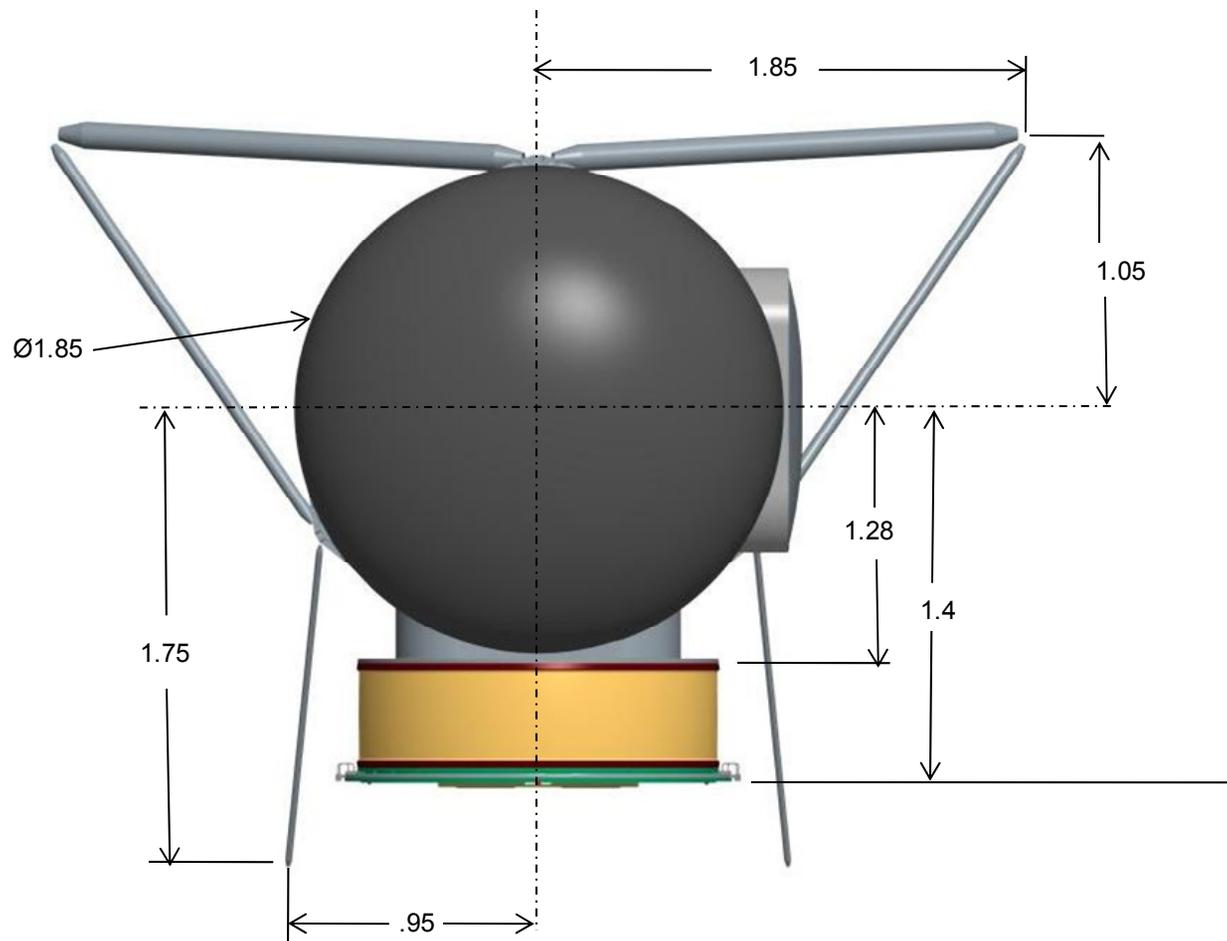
Top view of overall dimensions of airlock used in mock-up fabrication (dimensions in meters).
